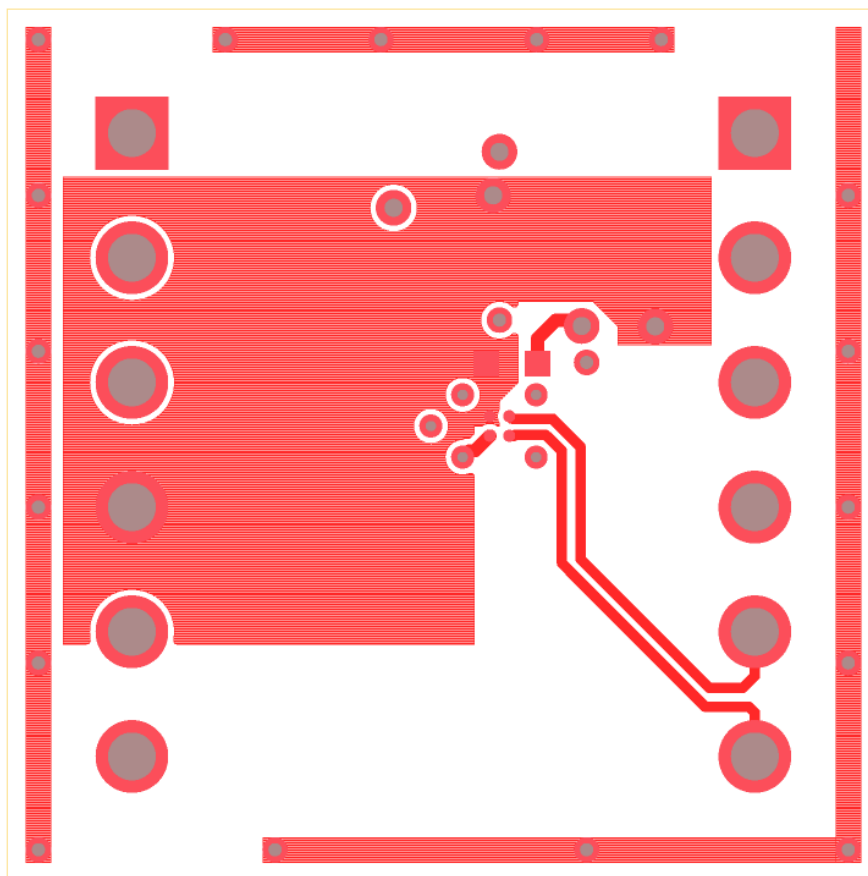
SMP-TPS61200-MVK Board Layer 1 – Top Side
